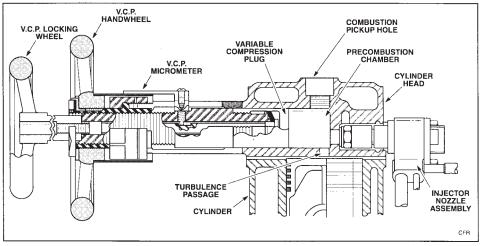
Cylinder Head and Handwheel Assembly—Sectional View
